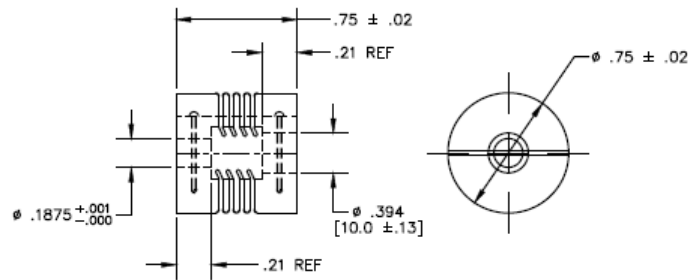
Coupling Adapter (Dimensions in inch [mm])
